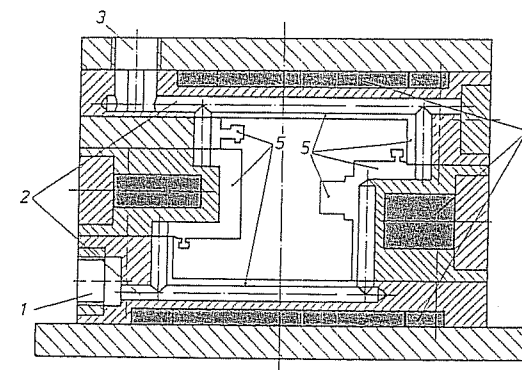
Section through the sizing equipment for window profiles [8], 1 Vacuum connection (lower part), 2 Vacuum channels, 3 Vacuum connection (upper part), 4 Cooling channels, 5 Vacuum slits
